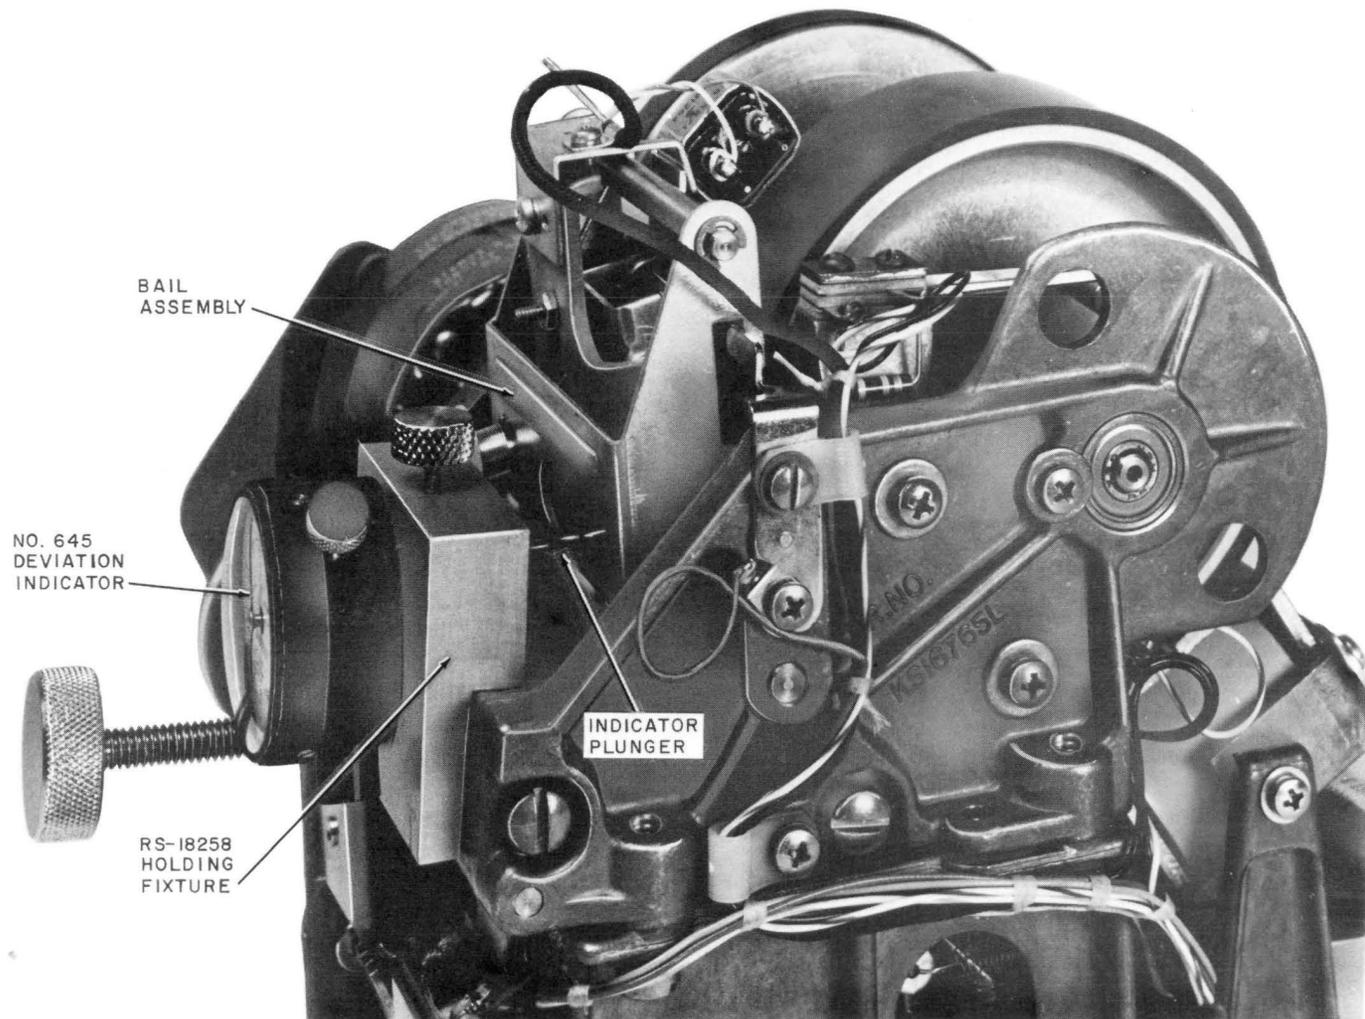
KS-16765 L3 Recorder—Carriage Alignment Set-up
